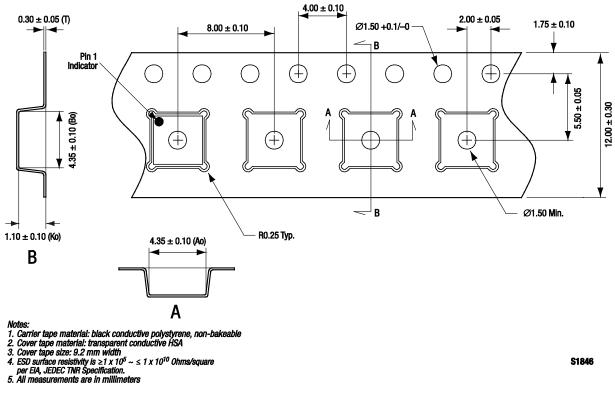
SKY67106-306LF Tape and Reel Dimensions
